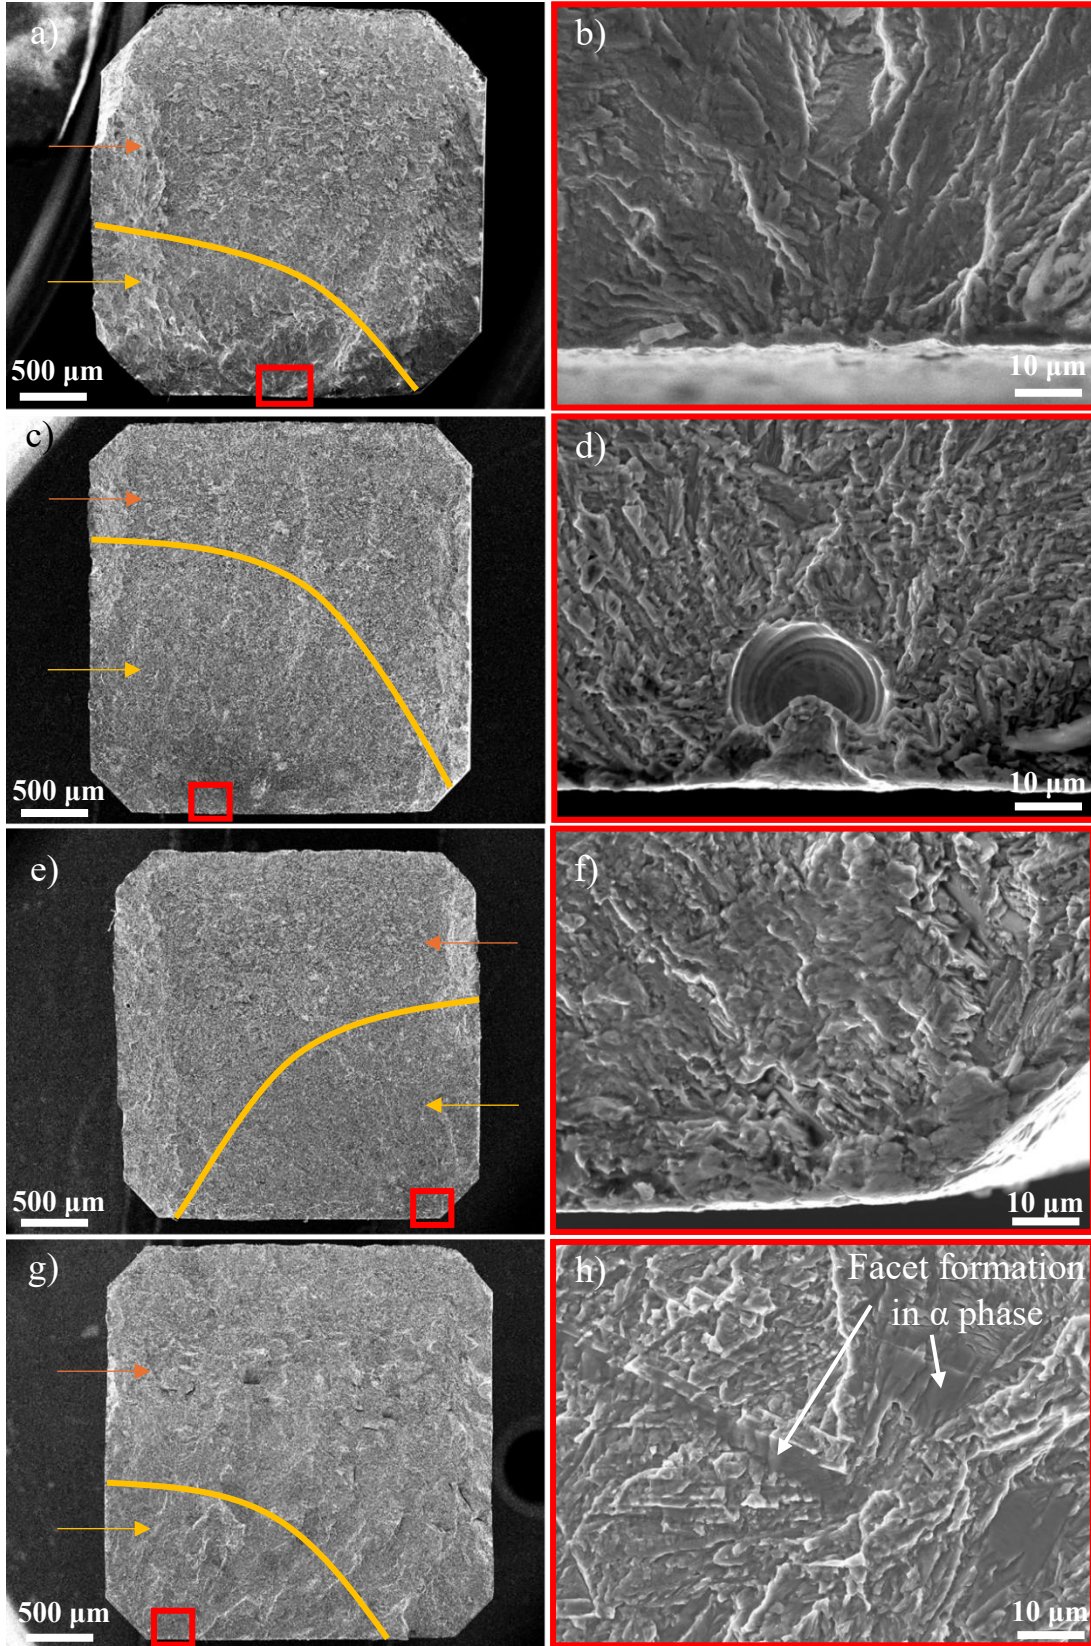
4-point bending fatigue fracture morphology. a) Annealed. b) Standard HIP. c) LTHP HIP. d) Super Beta HIP.
